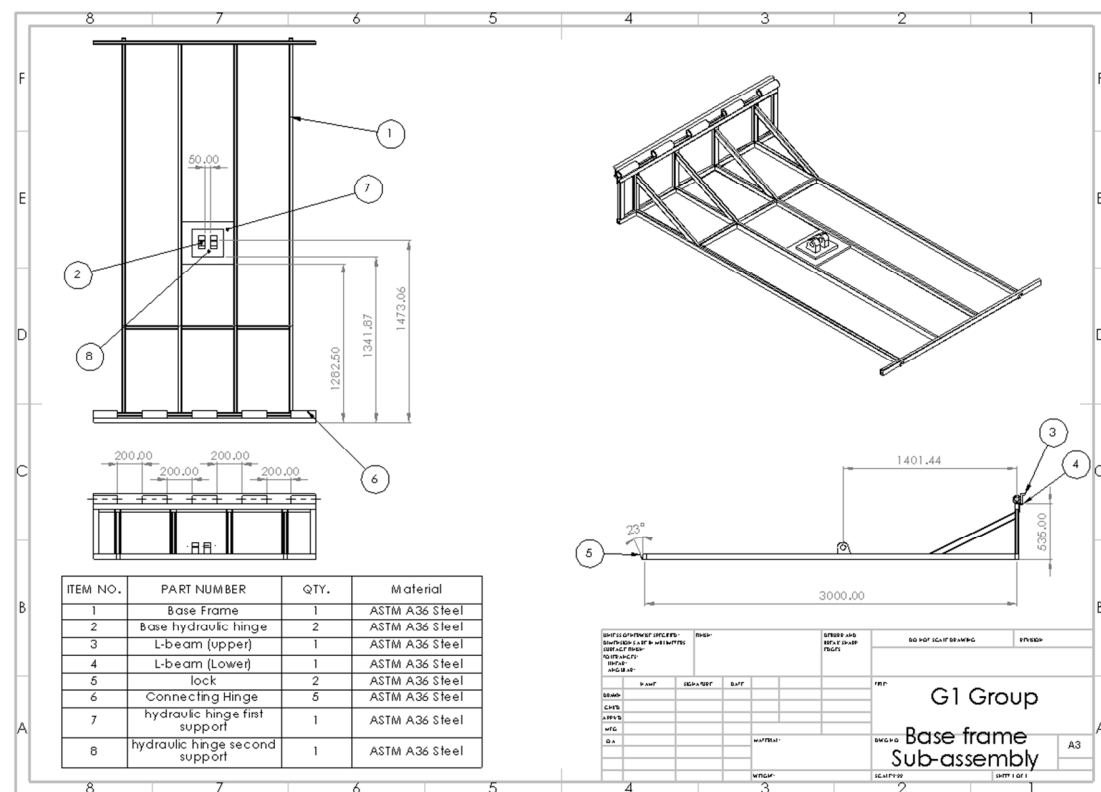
Main sub-assembly engineering drawing of the base frame showing general dimensions.
